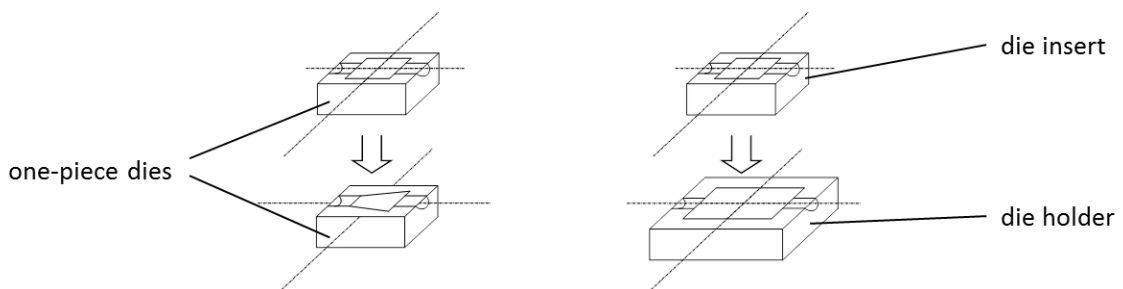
Replacement of the complete one-piece die (left) and 'die insert' fitted into a basic die holder (right), only bottom dies are shown (left and right)
